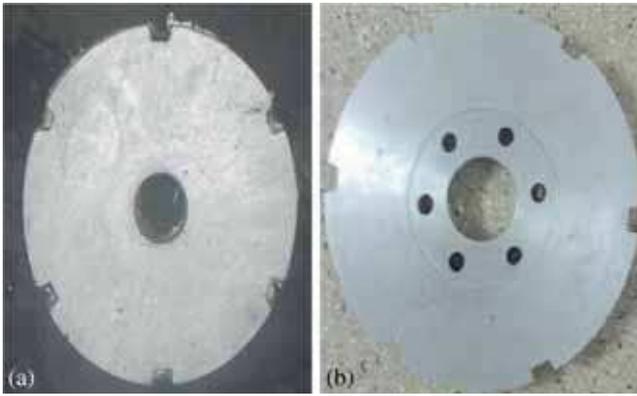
Casted disc brake rotor: (a) before machining and (b) after machining.
